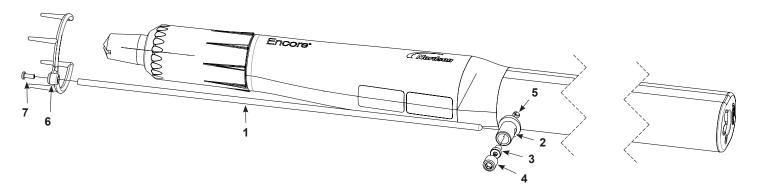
Ion Collector Installation - Tube-Mount Spray Gun (for clarity, some parts are not shown)
